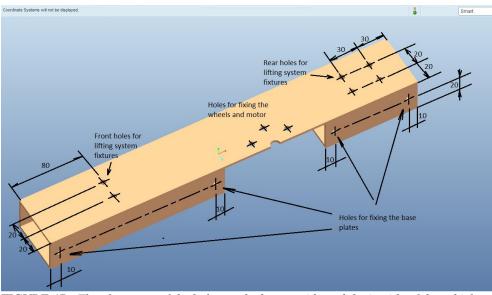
The placement of the holes on the bottom side and the in-side of the vehicle
